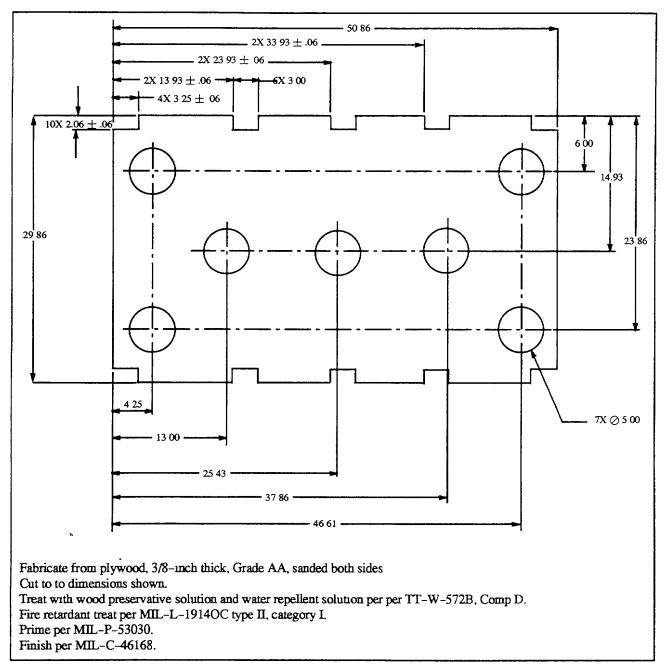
Deflector Assembly Storage Box, Shelf, Lower
